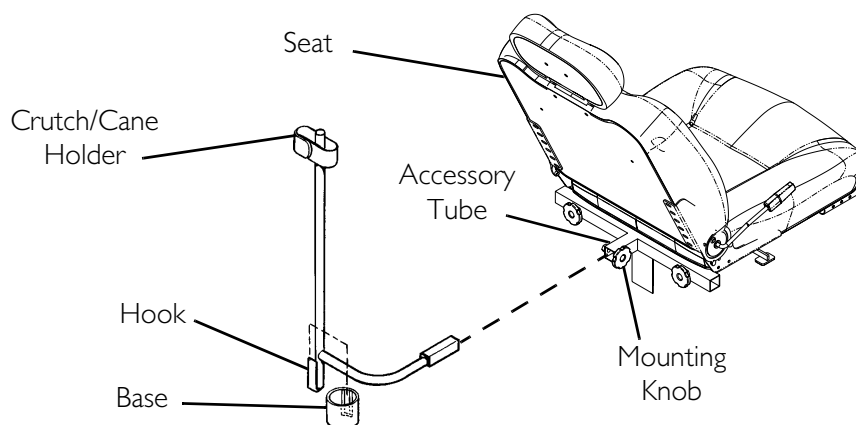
Installing/Removing the Crutch/Cane Holder
